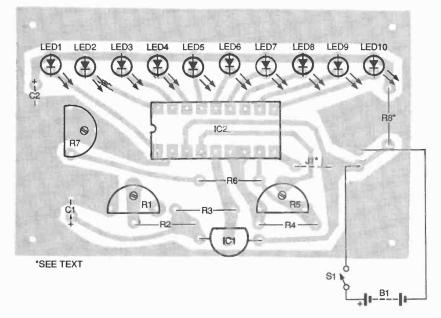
If you're building the Thermometer circuit on a PC board, use this partsplacement diagram as a guide.
